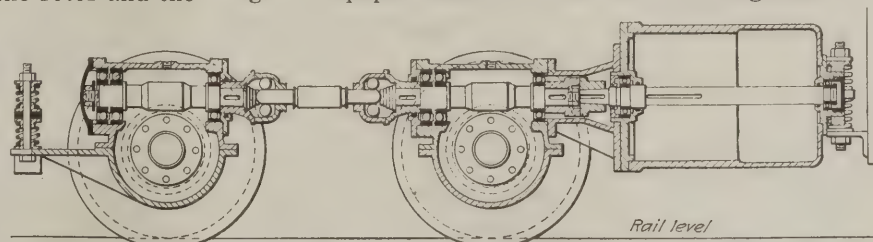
Ball Bearings Used with Locomotive Drive Shaft
